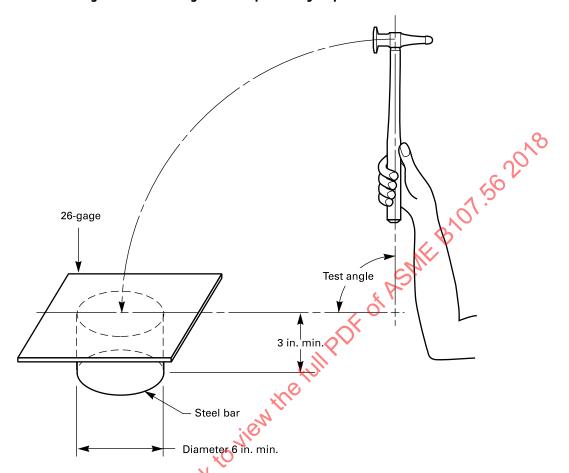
Striking Test Setup for Body Repair Hammers
